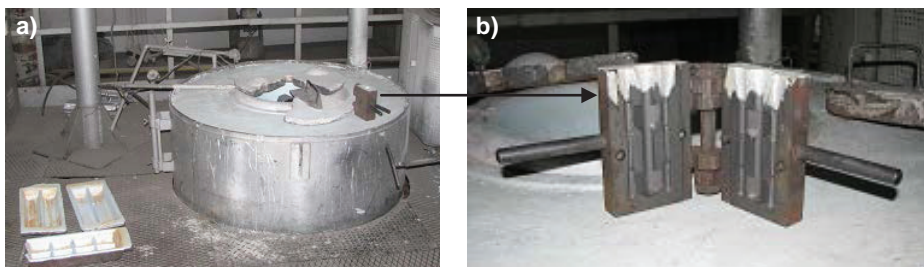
Stand for composites casting: a) PET type crucible furnace, b) cast iron mold
